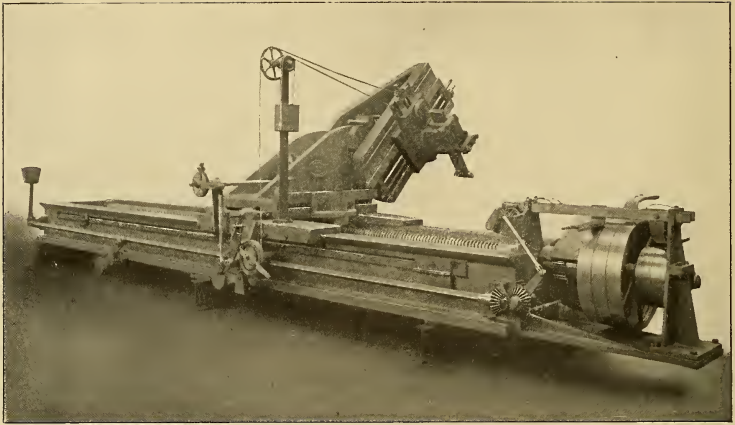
SPECIAL SIDE PLANER FOR ARMOUR PLATES, WITH ARM ADJUSTABLE TO ANY ANGLE.
